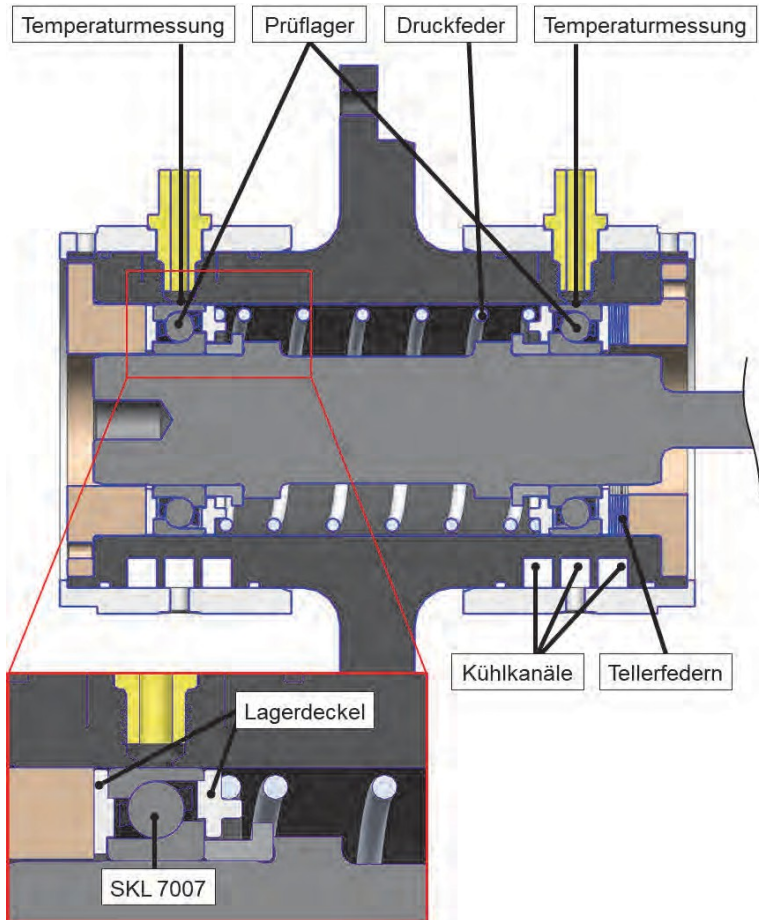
Cross-sectional views of the high-speed test bench with SKL 7007 and an enlarged view of the bearing covers
